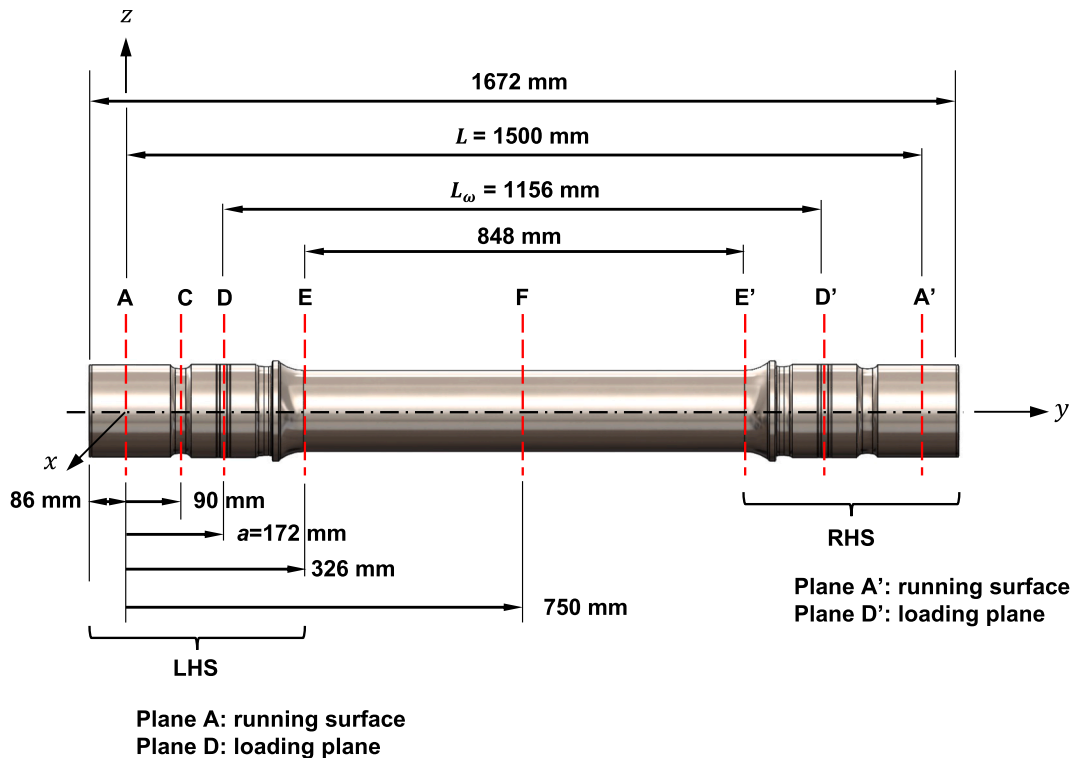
Inboard bearing, hollow trailer axle as manufactured by Lucchini R.S. showing positions of the critical sections along the length.
